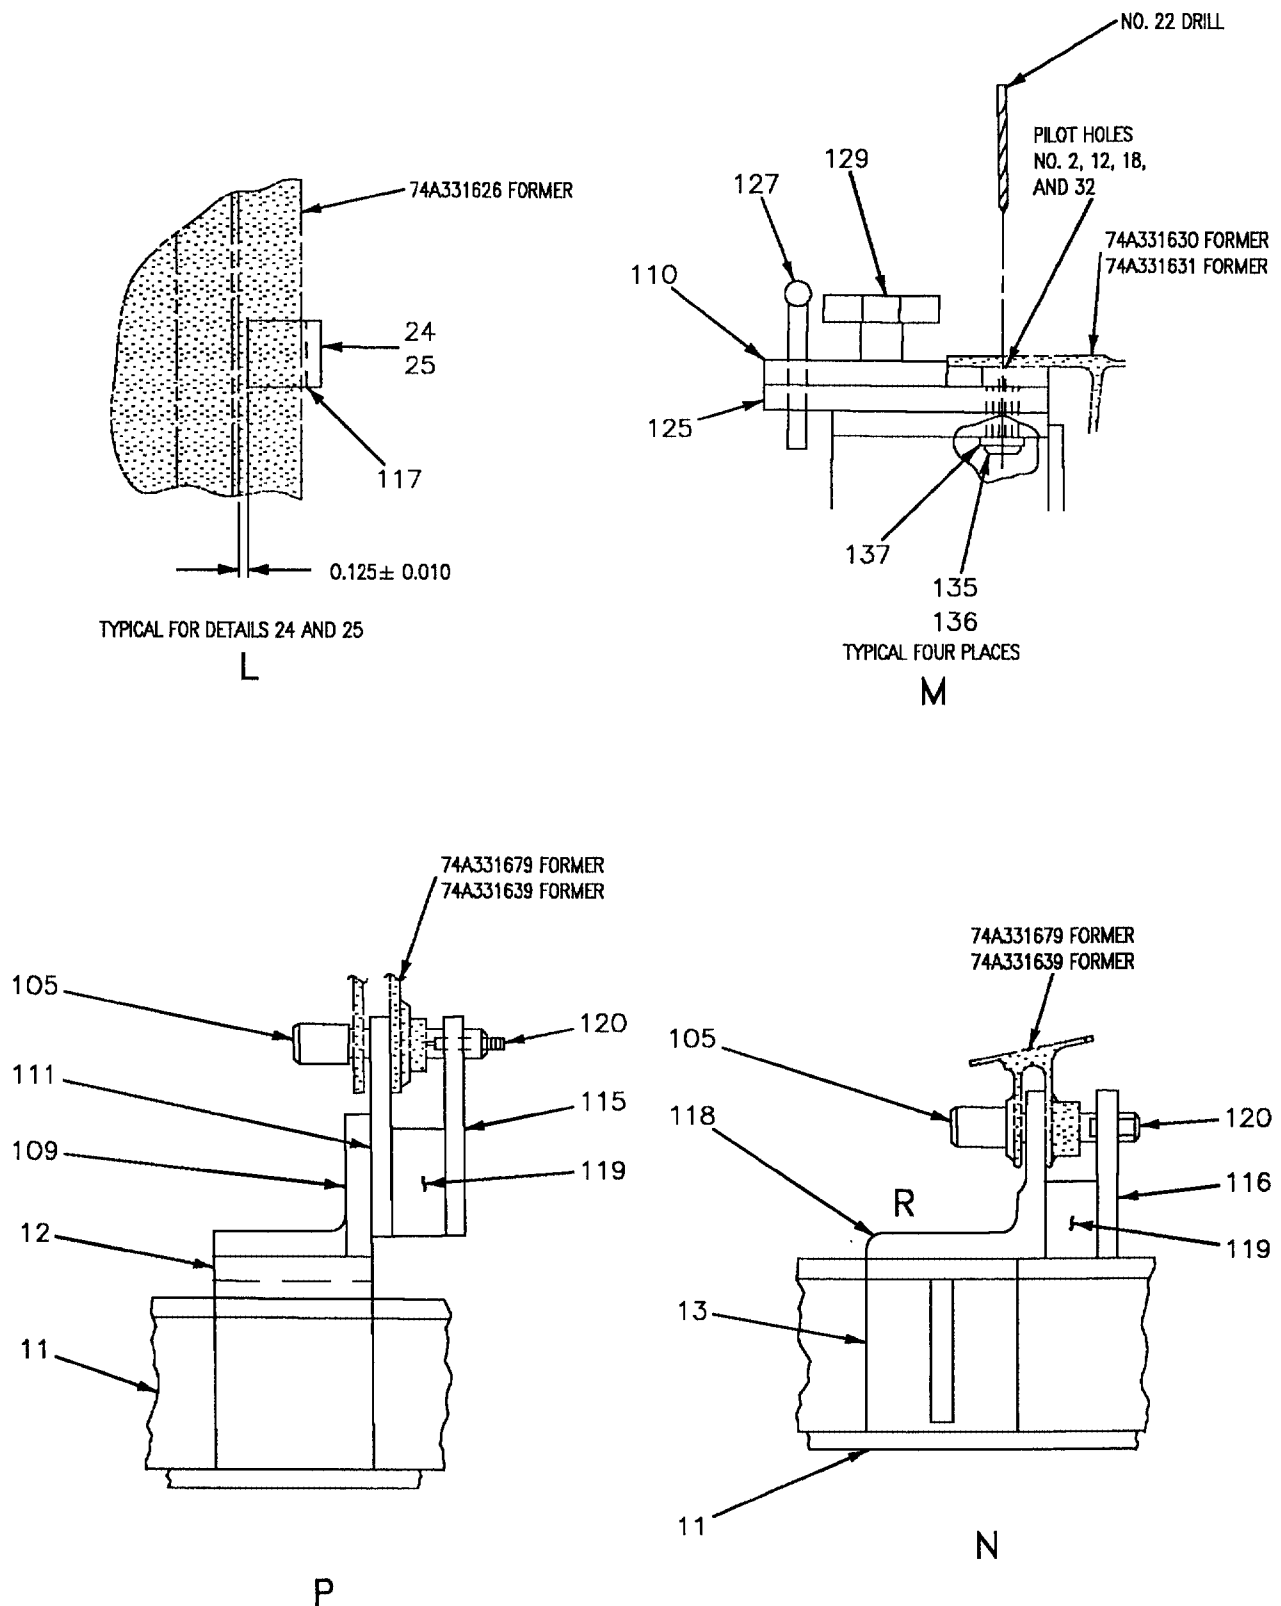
Maintenance Fixture RE174330621-1, -2 Details for Skin and Formers Replacement (Sheet 4)
